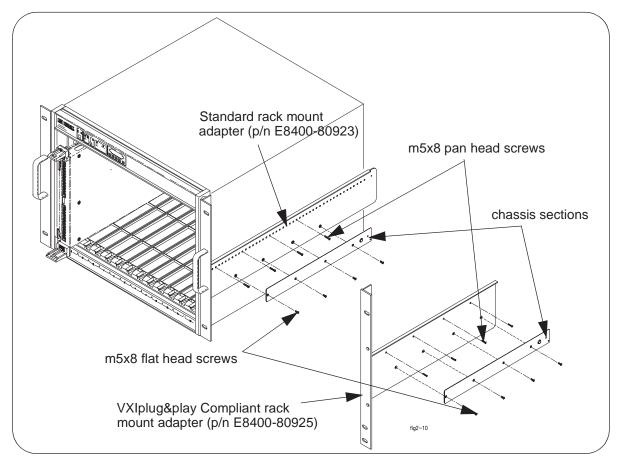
Attaching the Rack Mount Adapters and Chassis Sections to the Mainframe.
